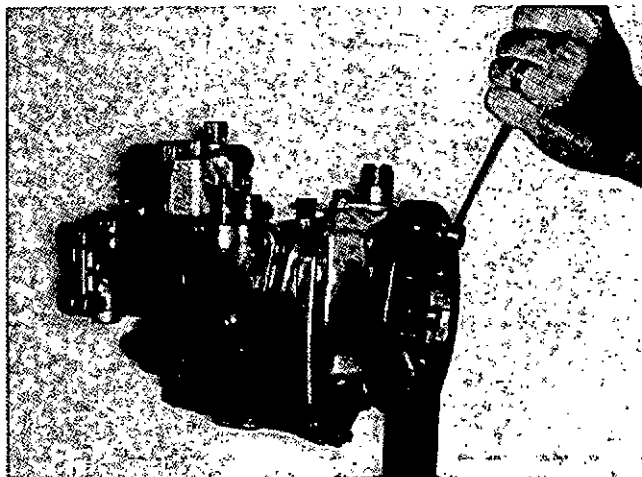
, (F5298). Mount the AFC type of fuel pump to the 3375133 Mounting Plate.
